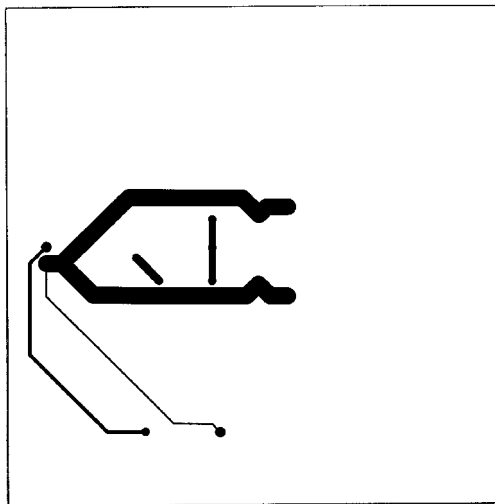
Recommended PWP PC Board Layout: Component-Side Layout
